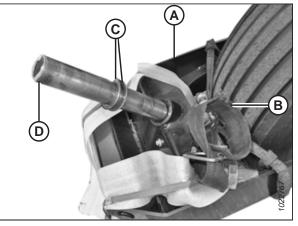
Caster Wheel Assembly in Shipping Configuration
